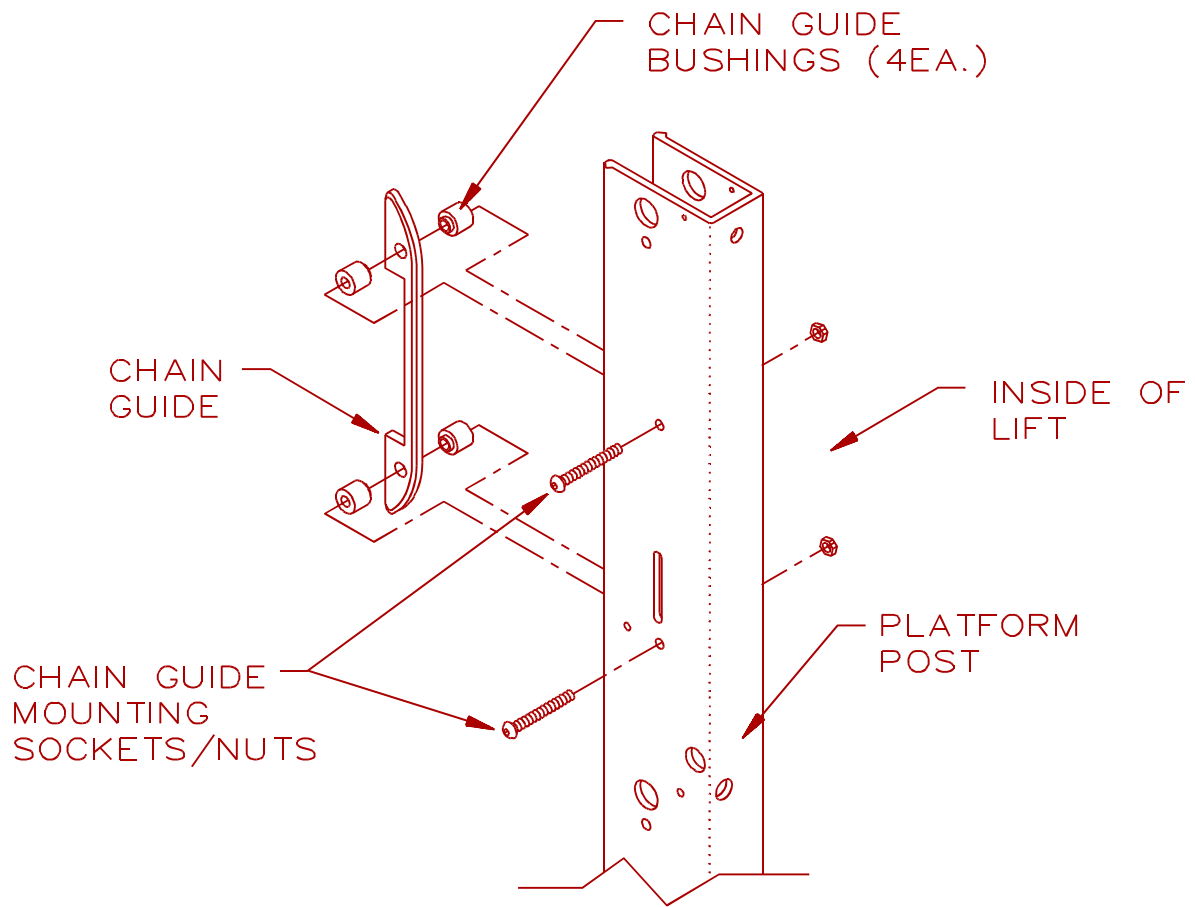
CHAIN GUIDE ASSEMBLY
